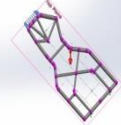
Applying weldments and Material to chassis as per requirement on Solidworks 2012
